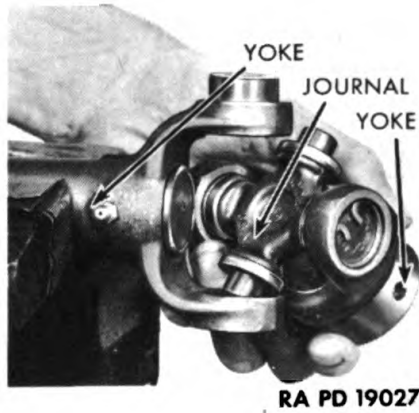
Removing Winch Drive Shaft Journal and Yoke
